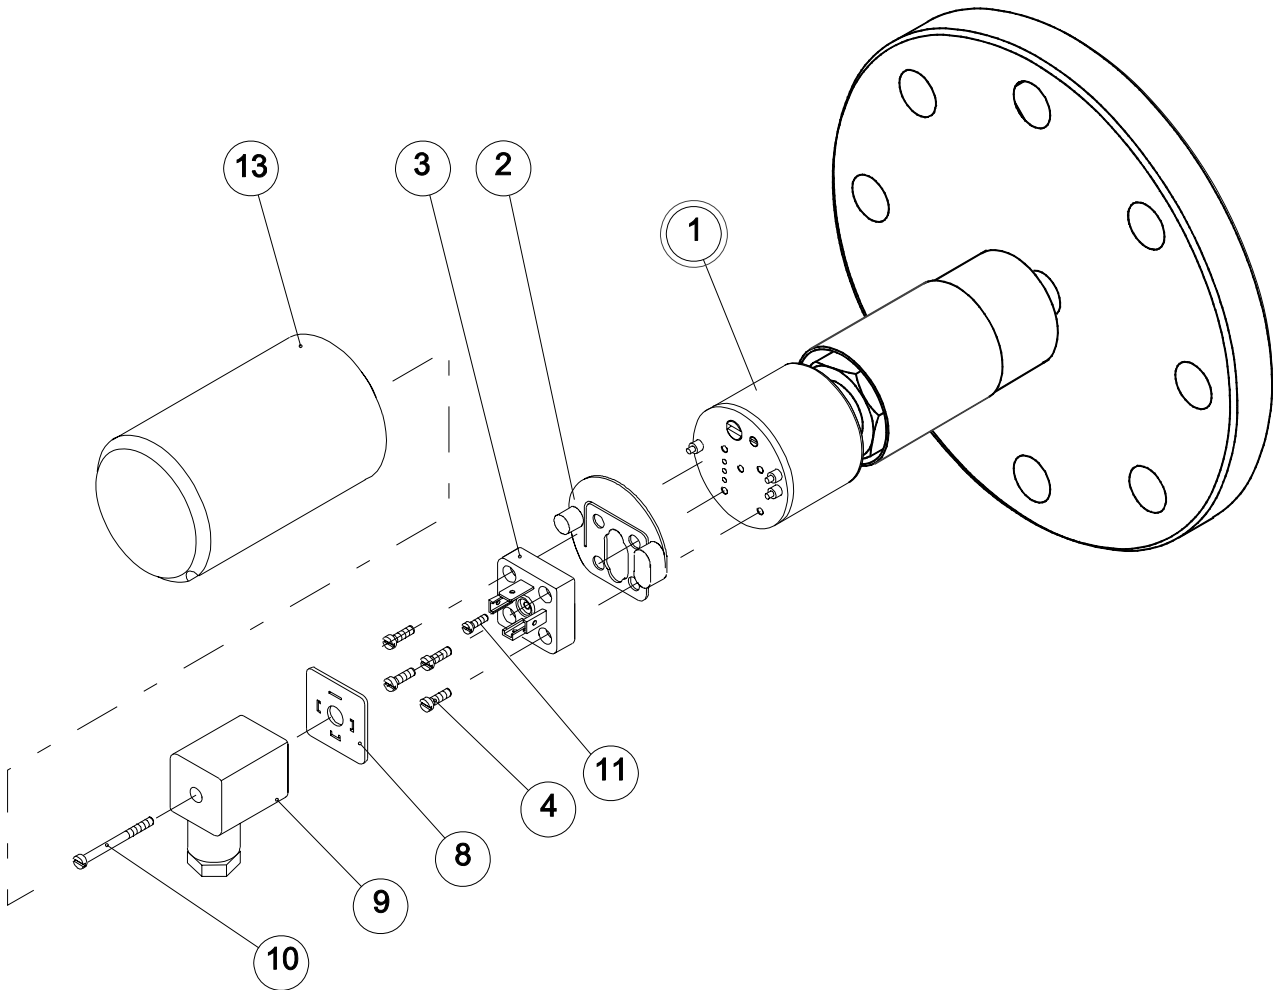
Parts list: VL with flange process connection and enclosure codes H and T
